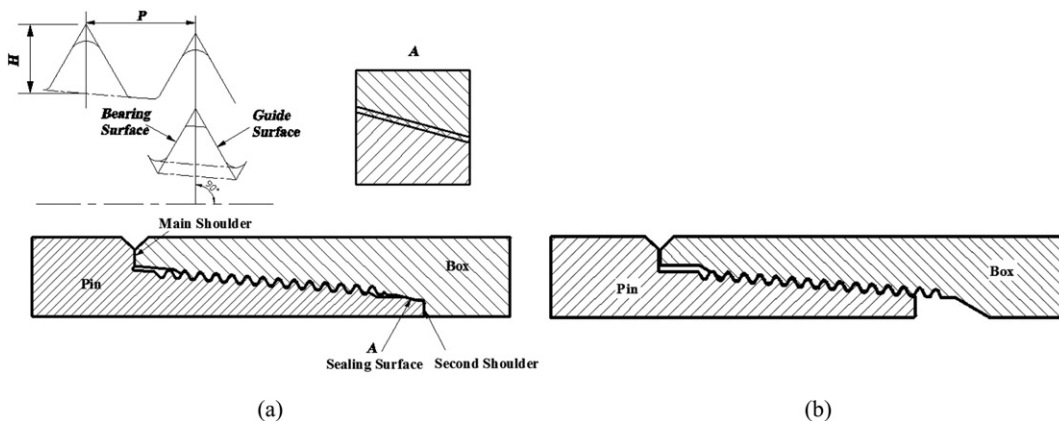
Structure diagram of tool joints. (a) Gas sealing joints; (b) NC38 joints.
